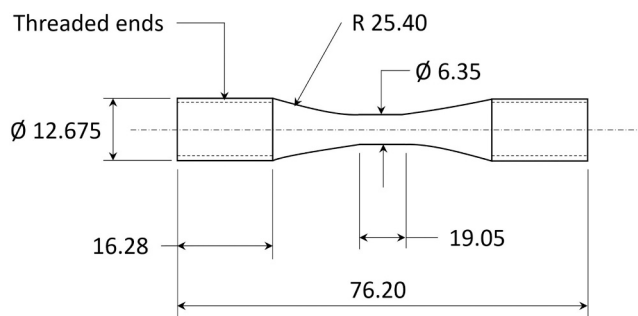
LCF test specimen geometry. All dimensions are in mm. Drawing not to scale.
